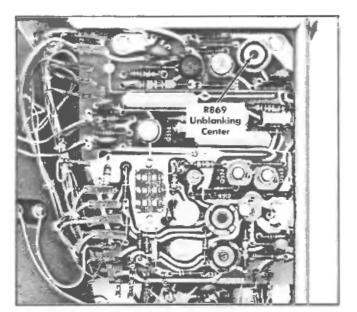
Location of Unblanking Center adjustment (Horizontal Amplifier board),
